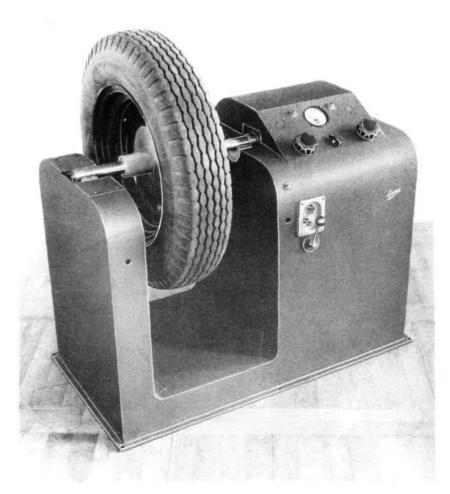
$$\rm X\,6501$$ Balancing machine for motor car wheels
